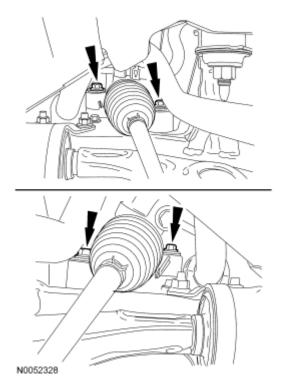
Locating Roll Restrictor Heat Shield Nuts Courtesy of FORD MOTOR CO.
